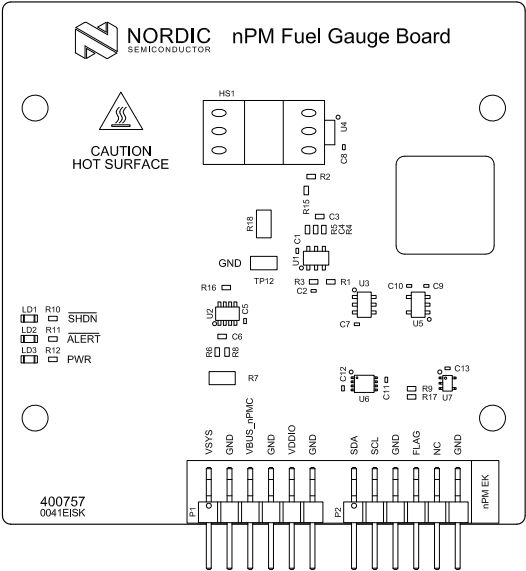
nPM Fuel Gauge Board (PCA63563), front view
